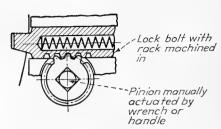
A rack is machined in the lock bolt. Pinion meshing with rack is manually actuated with wrench or handle.
